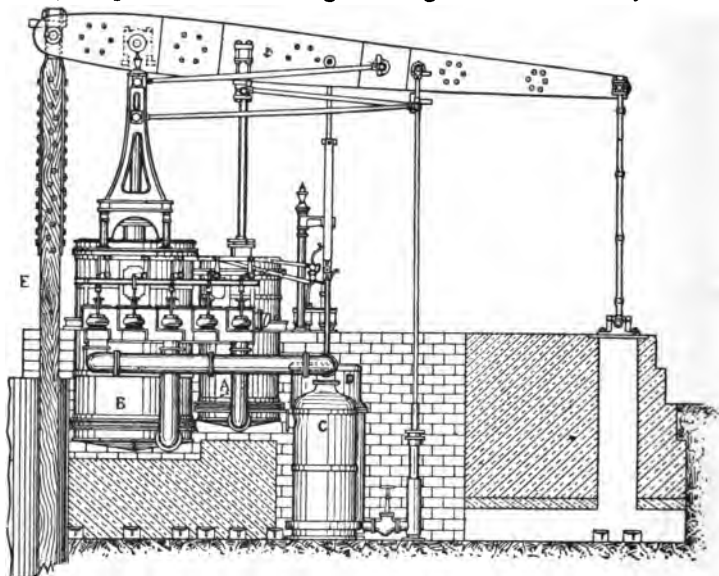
Barclay engine. A, high-pressure cylinder, 51 inches diameter; B, low-pressure cylinder, 73 inches diameter; C, condenser; D, air-pump; E, pump-rod. Stroke of A, 7 feet 9½ inches; stroke of B, 10 feet.
